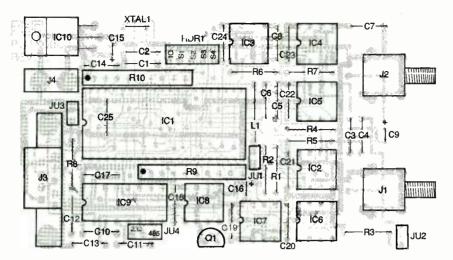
PARTS PLACEMENT DIAGRAM. Capacitor C24 is a tight fit, and must be offset slightly. One of the pins on jack J4 must be clipped off before mounting, and IC10 should be mounted flat against the board.
